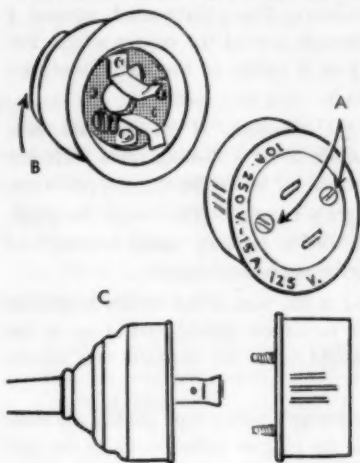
Attaching an extension cord to a cord connector and attachment plug cap
